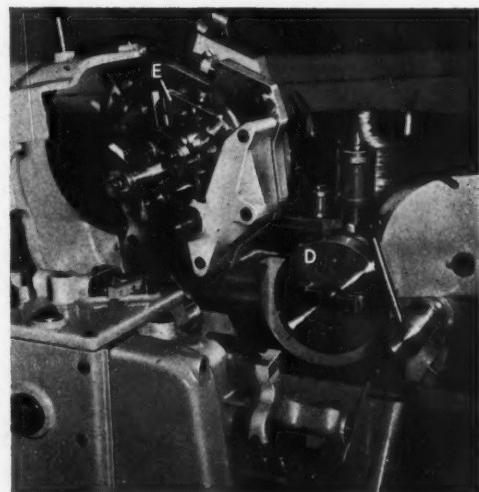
Close-up view of the Escomatic type DS 4 machine with the end-working attachment *E* in the raised position to give access to the tool-head
